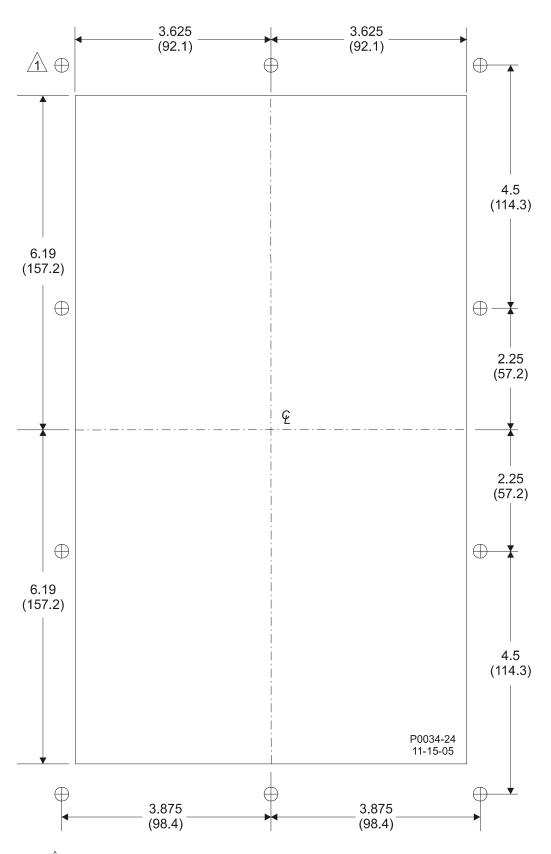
Panel Cutting and Drilling Dimensions, Panel Mount
